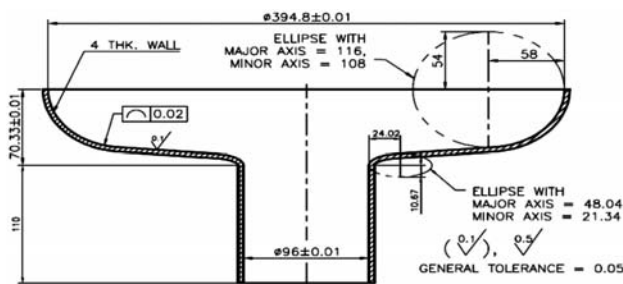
Engineering drawing for half-cell (end-cell) of CAVITY-2
